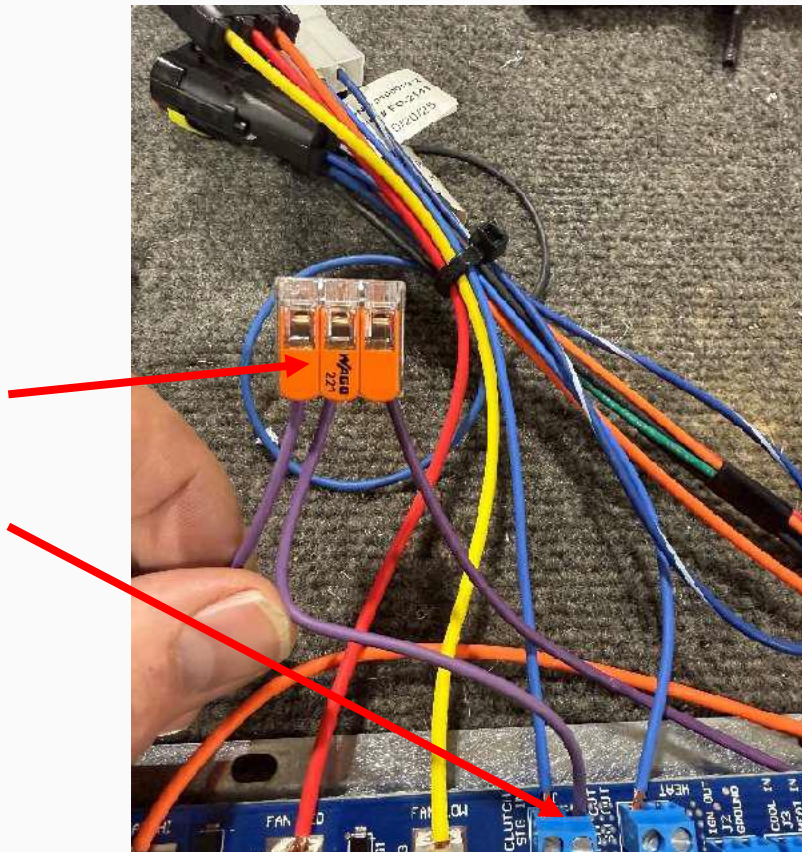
WAGO connector splice — removed purple wire and short purple wire to control board.
